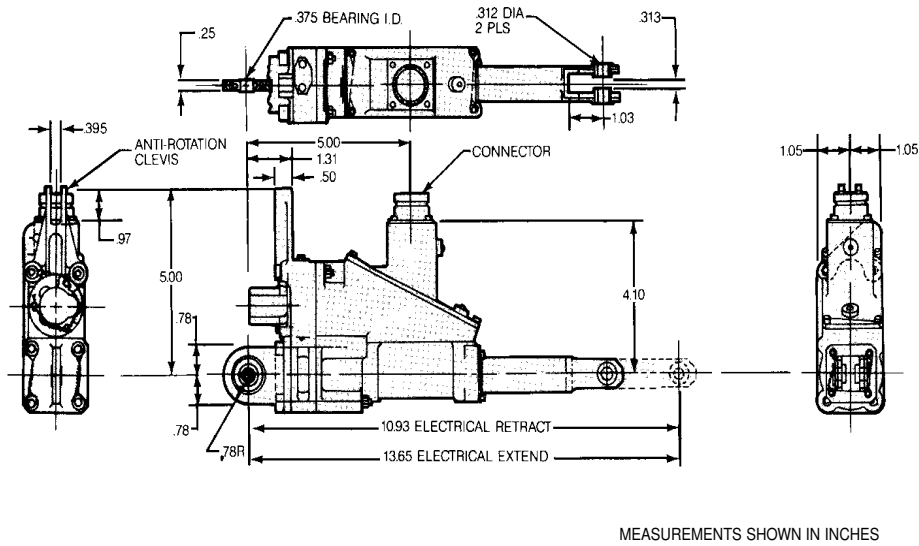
Measurements of Linear Actuator 658D100 for Rudder trim surface (Eaton Corporation)
